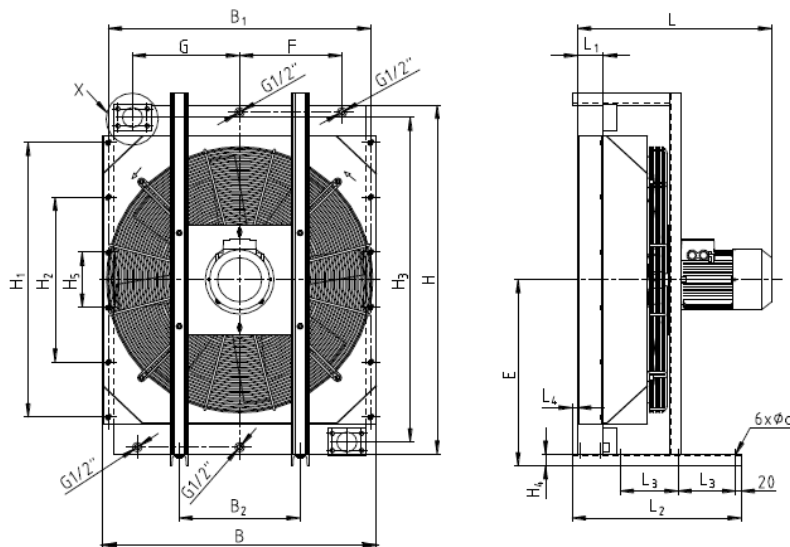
View of the cooler for use in a potentially explosive atmosphere [16]
